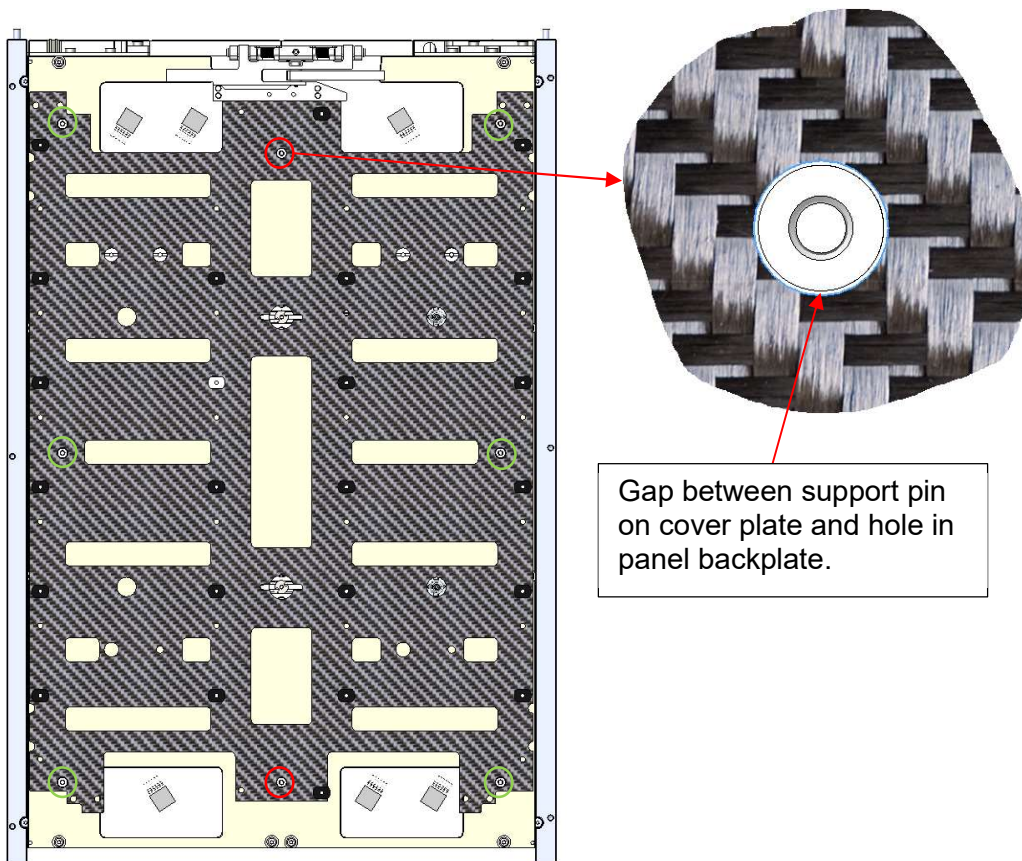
Engagement between support pin on cover plate and hole in panel backplate.
